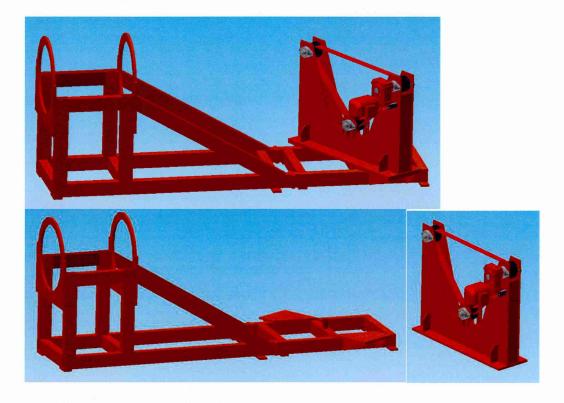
Mandrel Support Frame With Incorporated Belt Drive.
